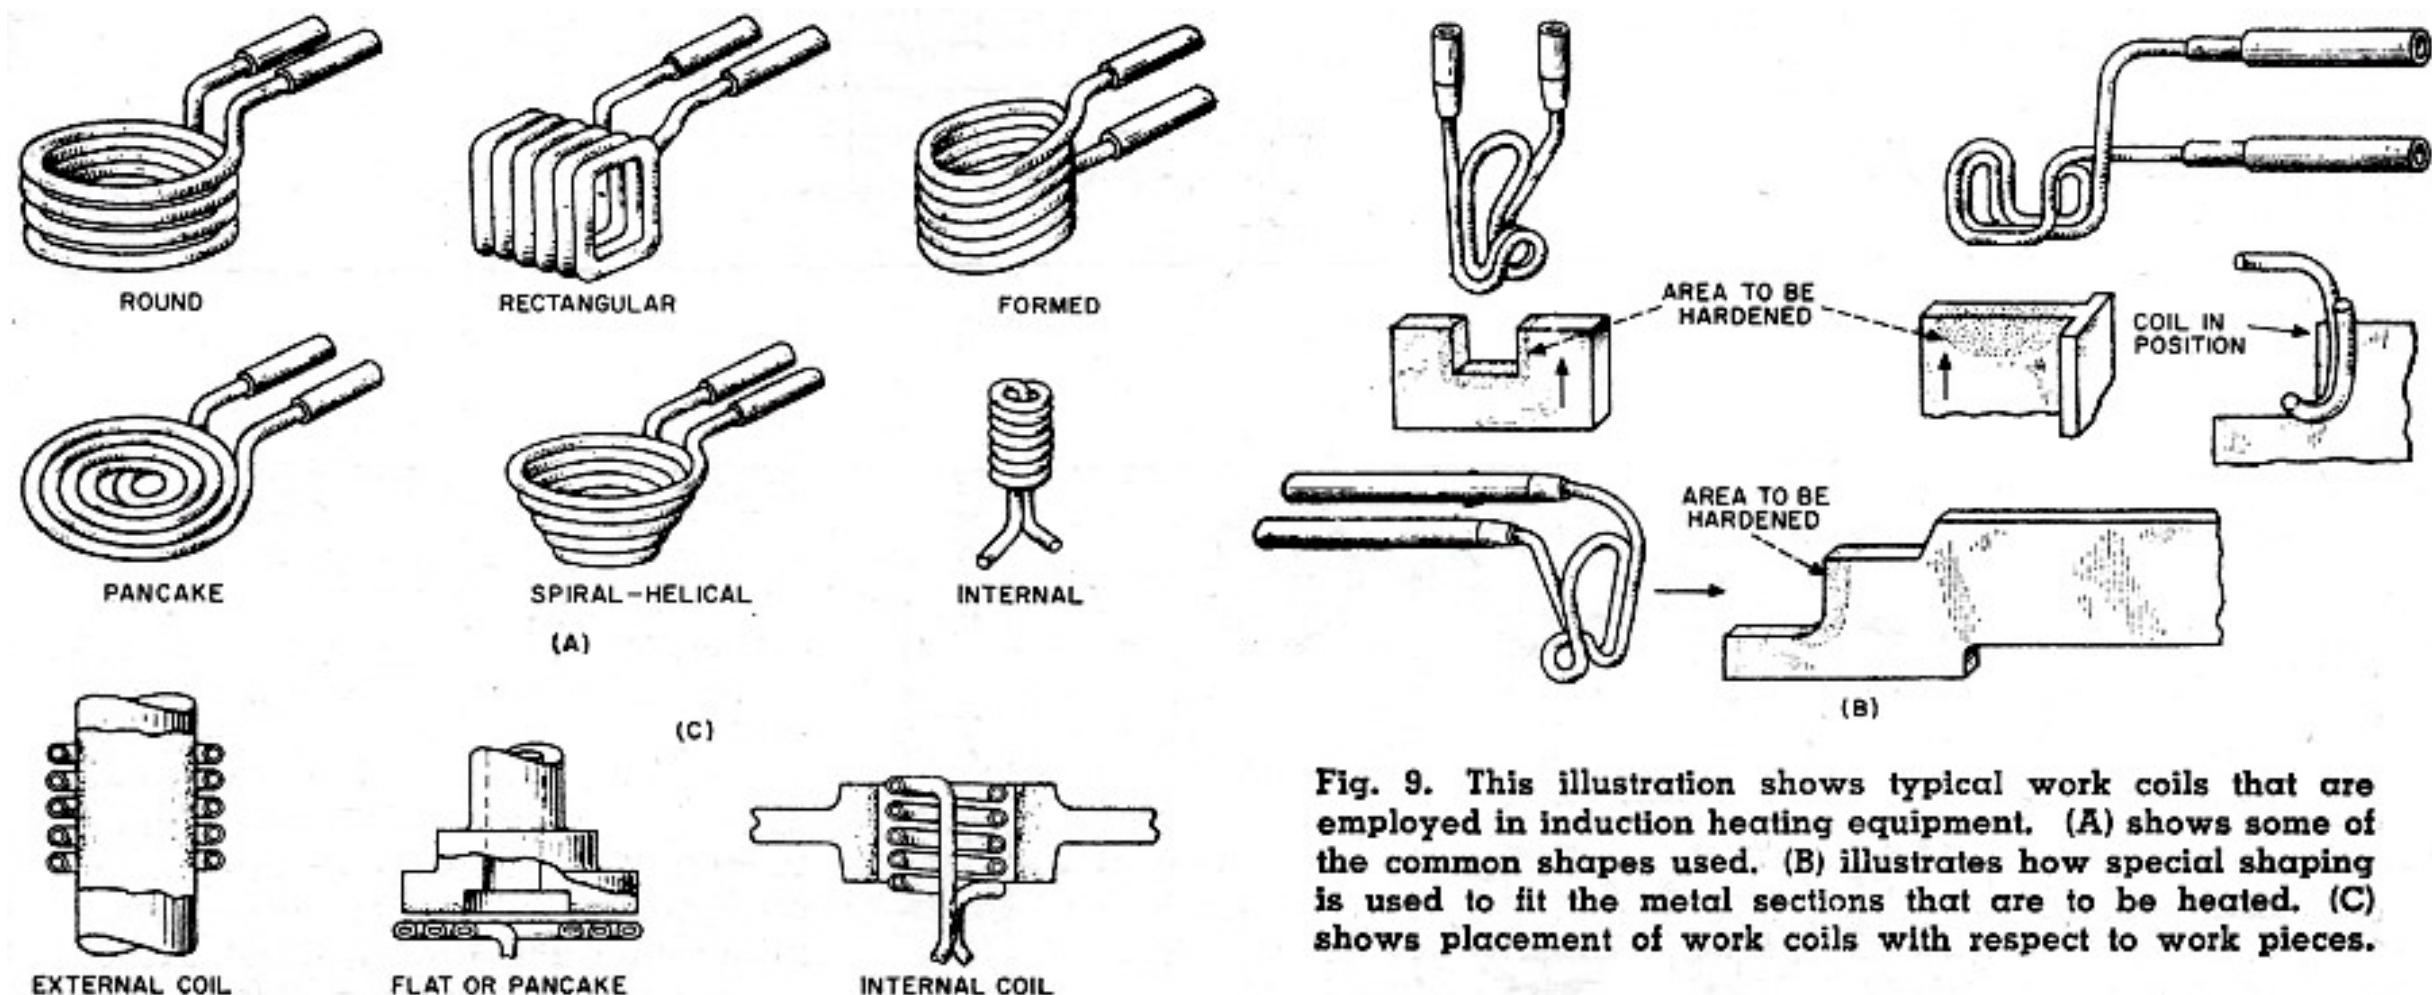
This illustration shows typical work coils that are employed in induction heating equipment. (A) shows some of the common shapes used. (B) illustrates how special shaping is used to fit the metal sections that are to be heated. (C) shows placement of work coils with respect to work pieces.
